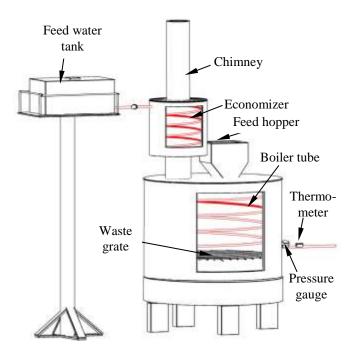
Sectional view of the fixed grate incinerator with circular boiler tube
